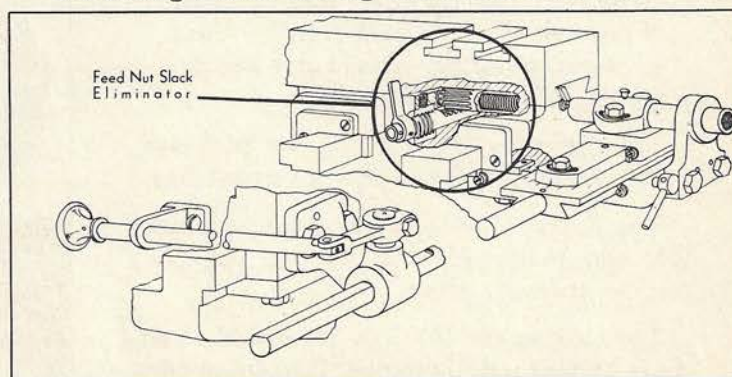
Taper Attachment Feed Nut Slack Eliminator (To Special Order Only)
